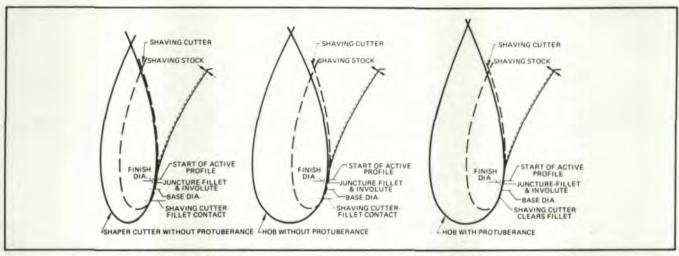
Generating paths of shaper cutter, hobs and rotary-shaving cutters in fillet area on same tooth.
